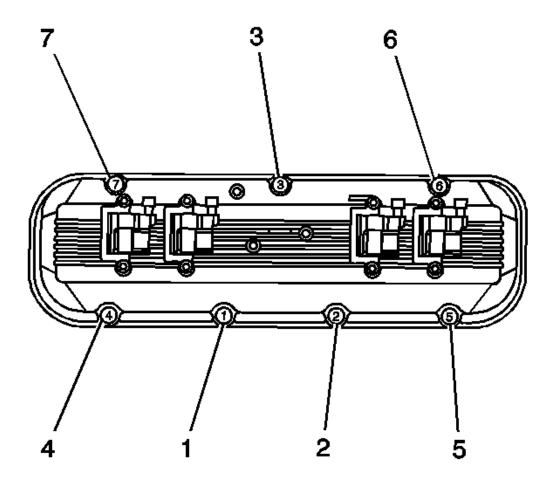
View Of Valve Rocker Arm Cover (Right) Courtesy of GENERAL MOTORS CORP.
